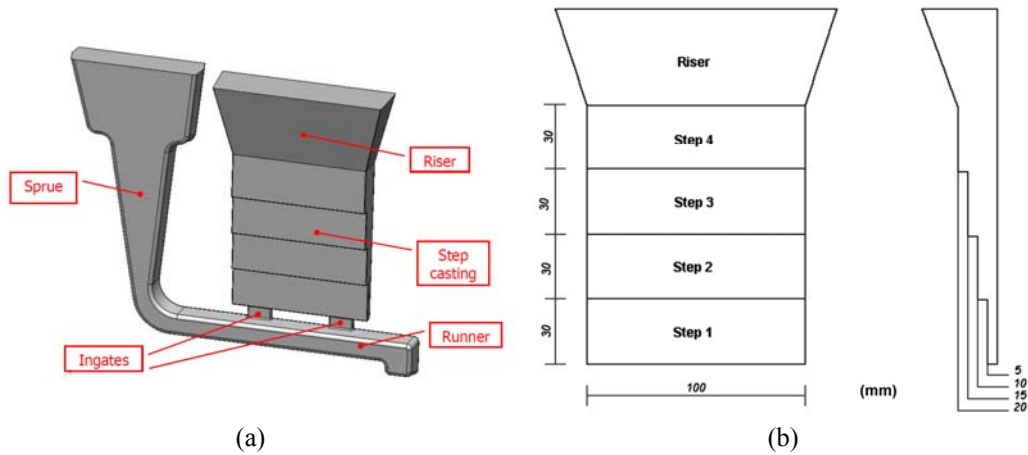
(a) The step casting CAD geometry with (b) front and side views.
